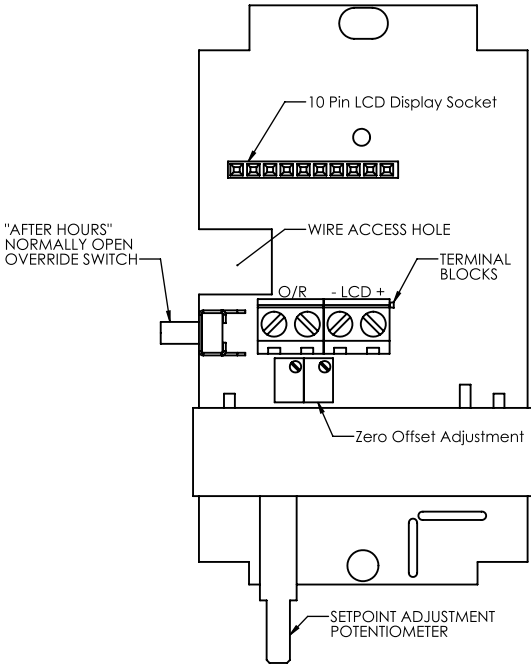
SETPOINT PCB MOUNTED ON BACKPLATE
